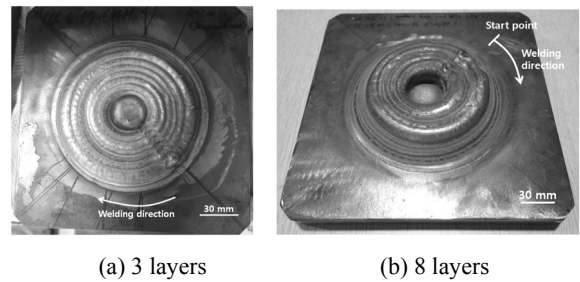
Appearances of welding specimens after Pad overlay welding
